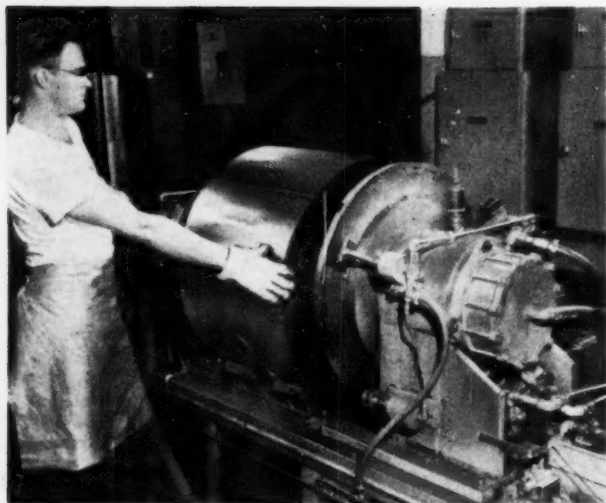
The Cylindrical Drum Housing is Flanged on this Special Machine. Two Heads Enter the Cylinder and are Expanded to Position and Rotate it. Two Sets of Rolls then Form the Flanges Outwards
